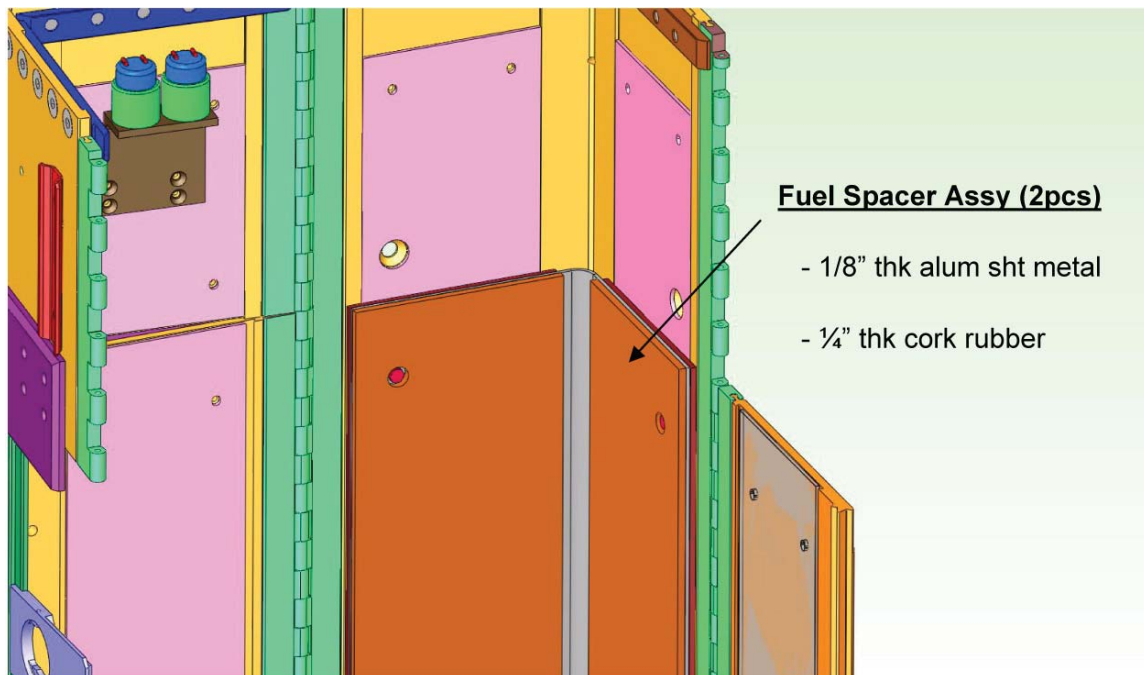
E XL Clamshell Fuel Spacer Assembly
